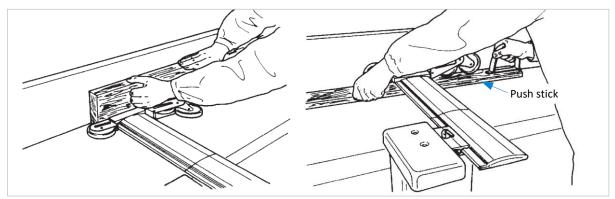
Planing of workpieces with small cross-sections and planing of workpiece sides
